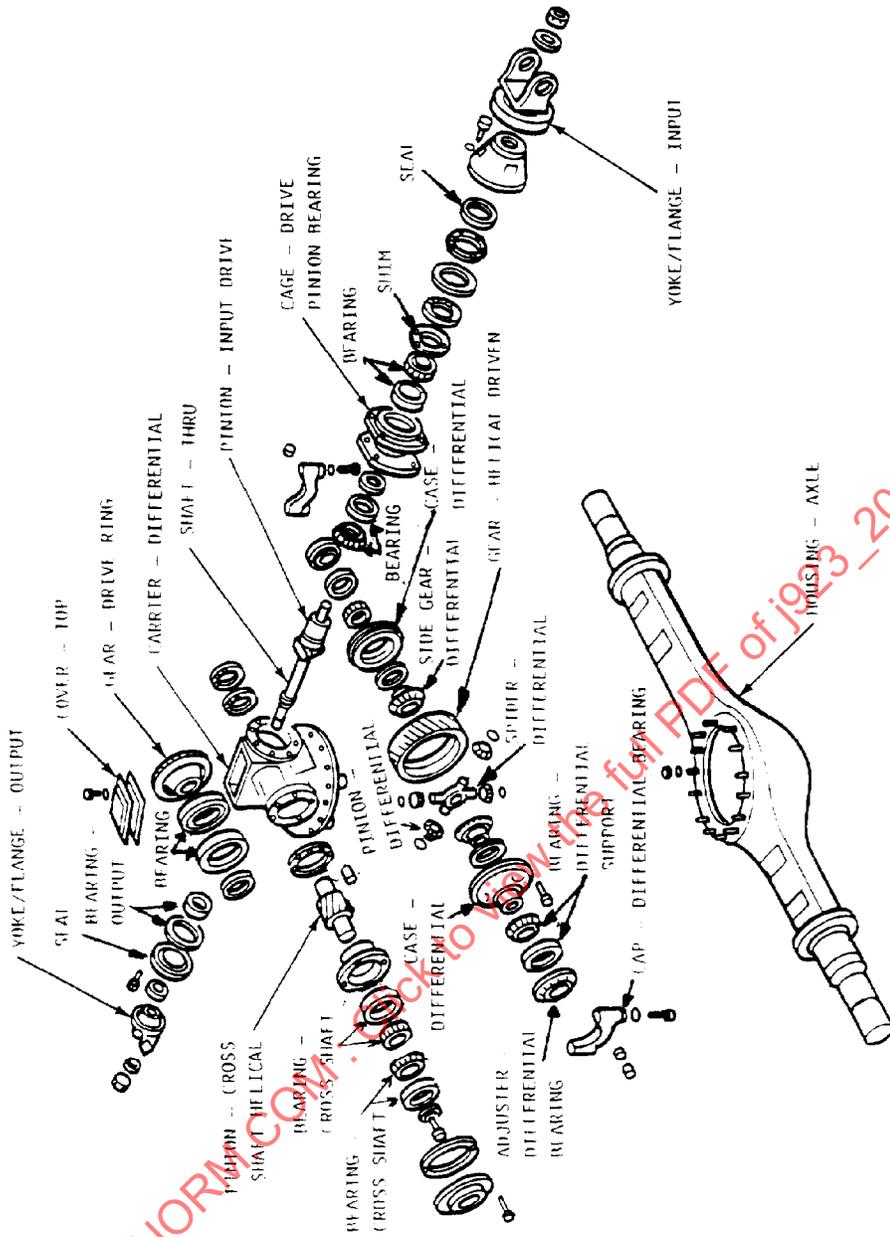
C—TANDEM FORWARD TOP-MOUNTED DOUBLE REDUCTION DRIVE AXLE CONSTRUCTION
